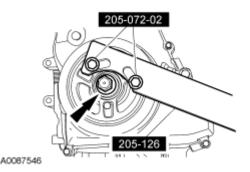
Using Special Tools (205-126, 205-072-02) To Hold Crankshaft Pulley In Place
